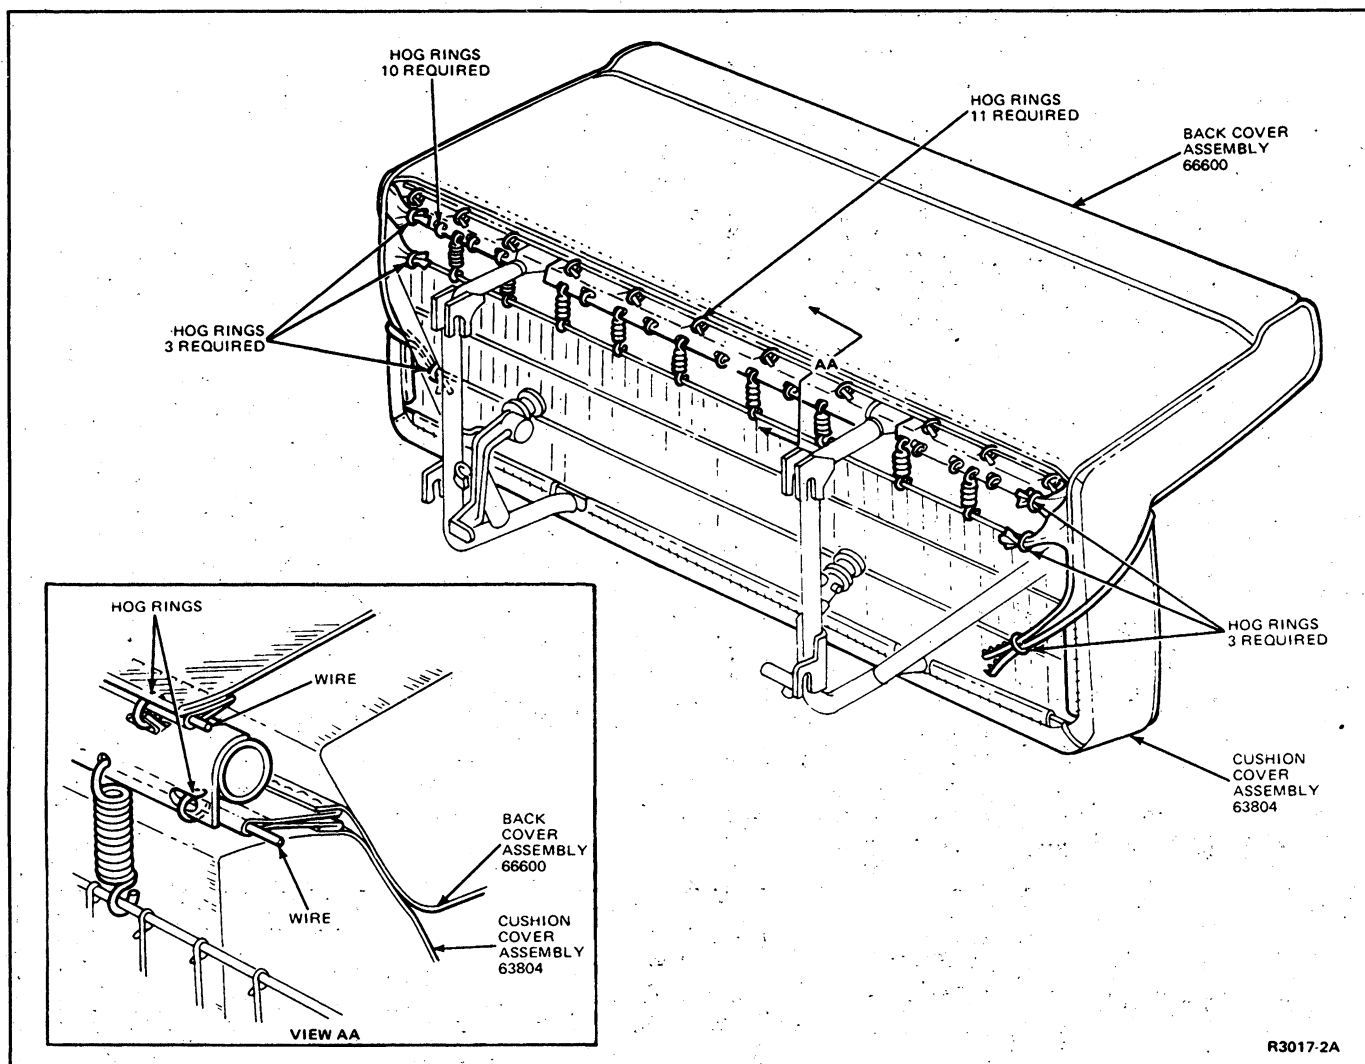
Rear Seat Cover Assemblies—E-150—E-350 (Three Passenger Seats)
